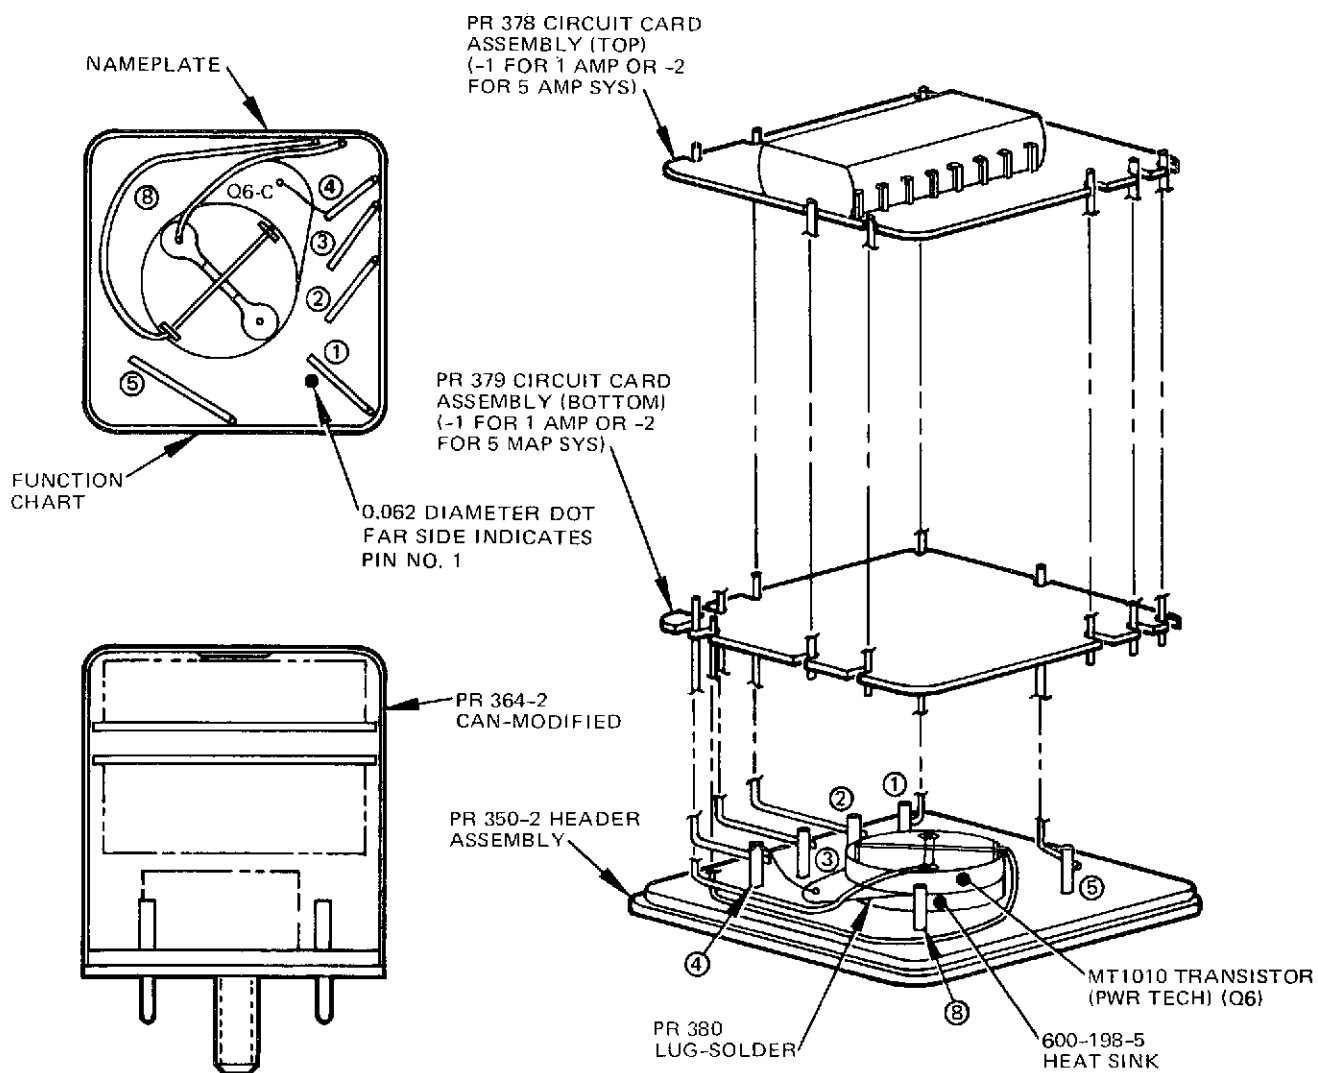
ASSEMBLY LAYOUT 1 AMP AND 5 AMP DC CONTROLLERS
